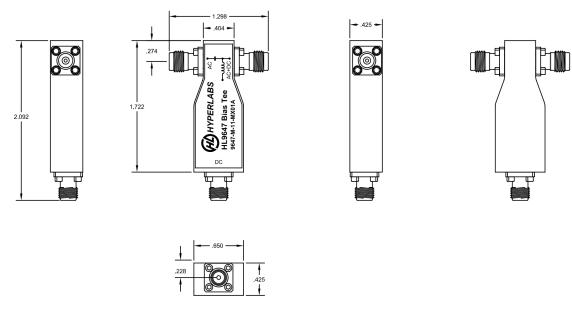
HL9647 with SMA DC bias port Mechanical Drawing
